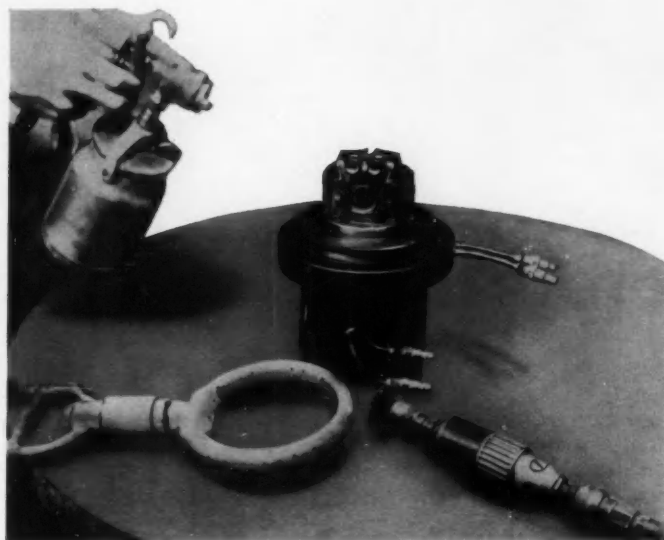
Applying mold coating to five-piece core and ring assembly for automotive piston.
